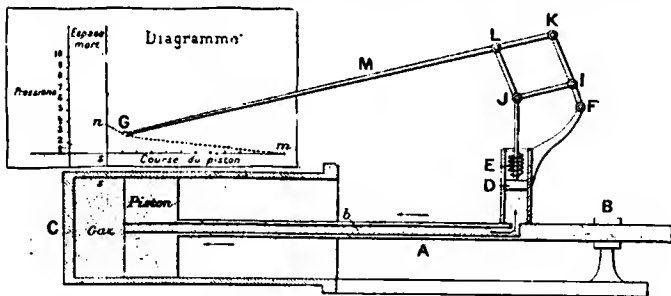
Sketch of an apparatus for making diagrams. A, hollow tube of piston; B, guide for piston tube; C, cylinder; D, small cylinder; E, spring; F, articulation of parallelogram I, J, K, L; M, arm with pencil attached; G, pencil; s, s, end of piston stroke; b, pressure tube; m, n, curve indicated during compression stroke.
